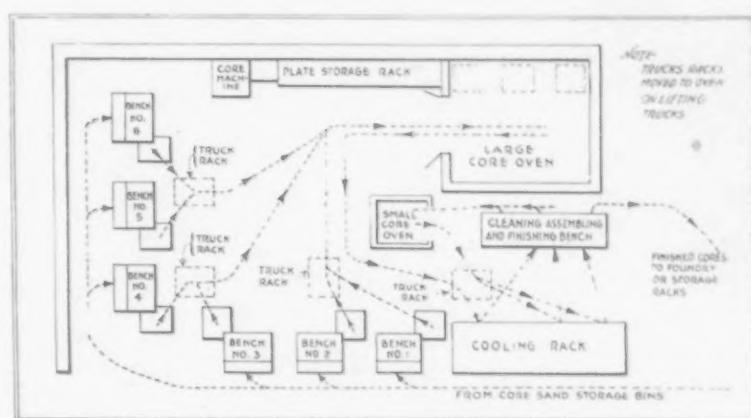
This plan shows the steps taken to rearrange this core room to give the work a better routing. The crossing and interfering of the work was eliminated by erecting new benches and changing the location of equipment
